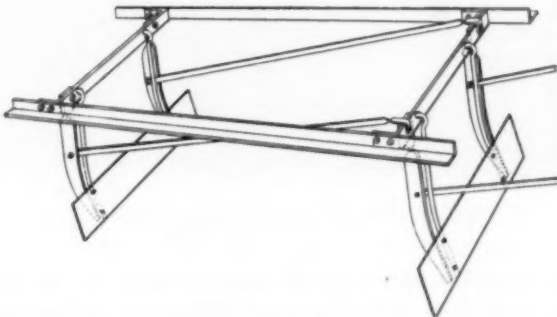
RECIPROCATING SCRAPER CONVEYOR
